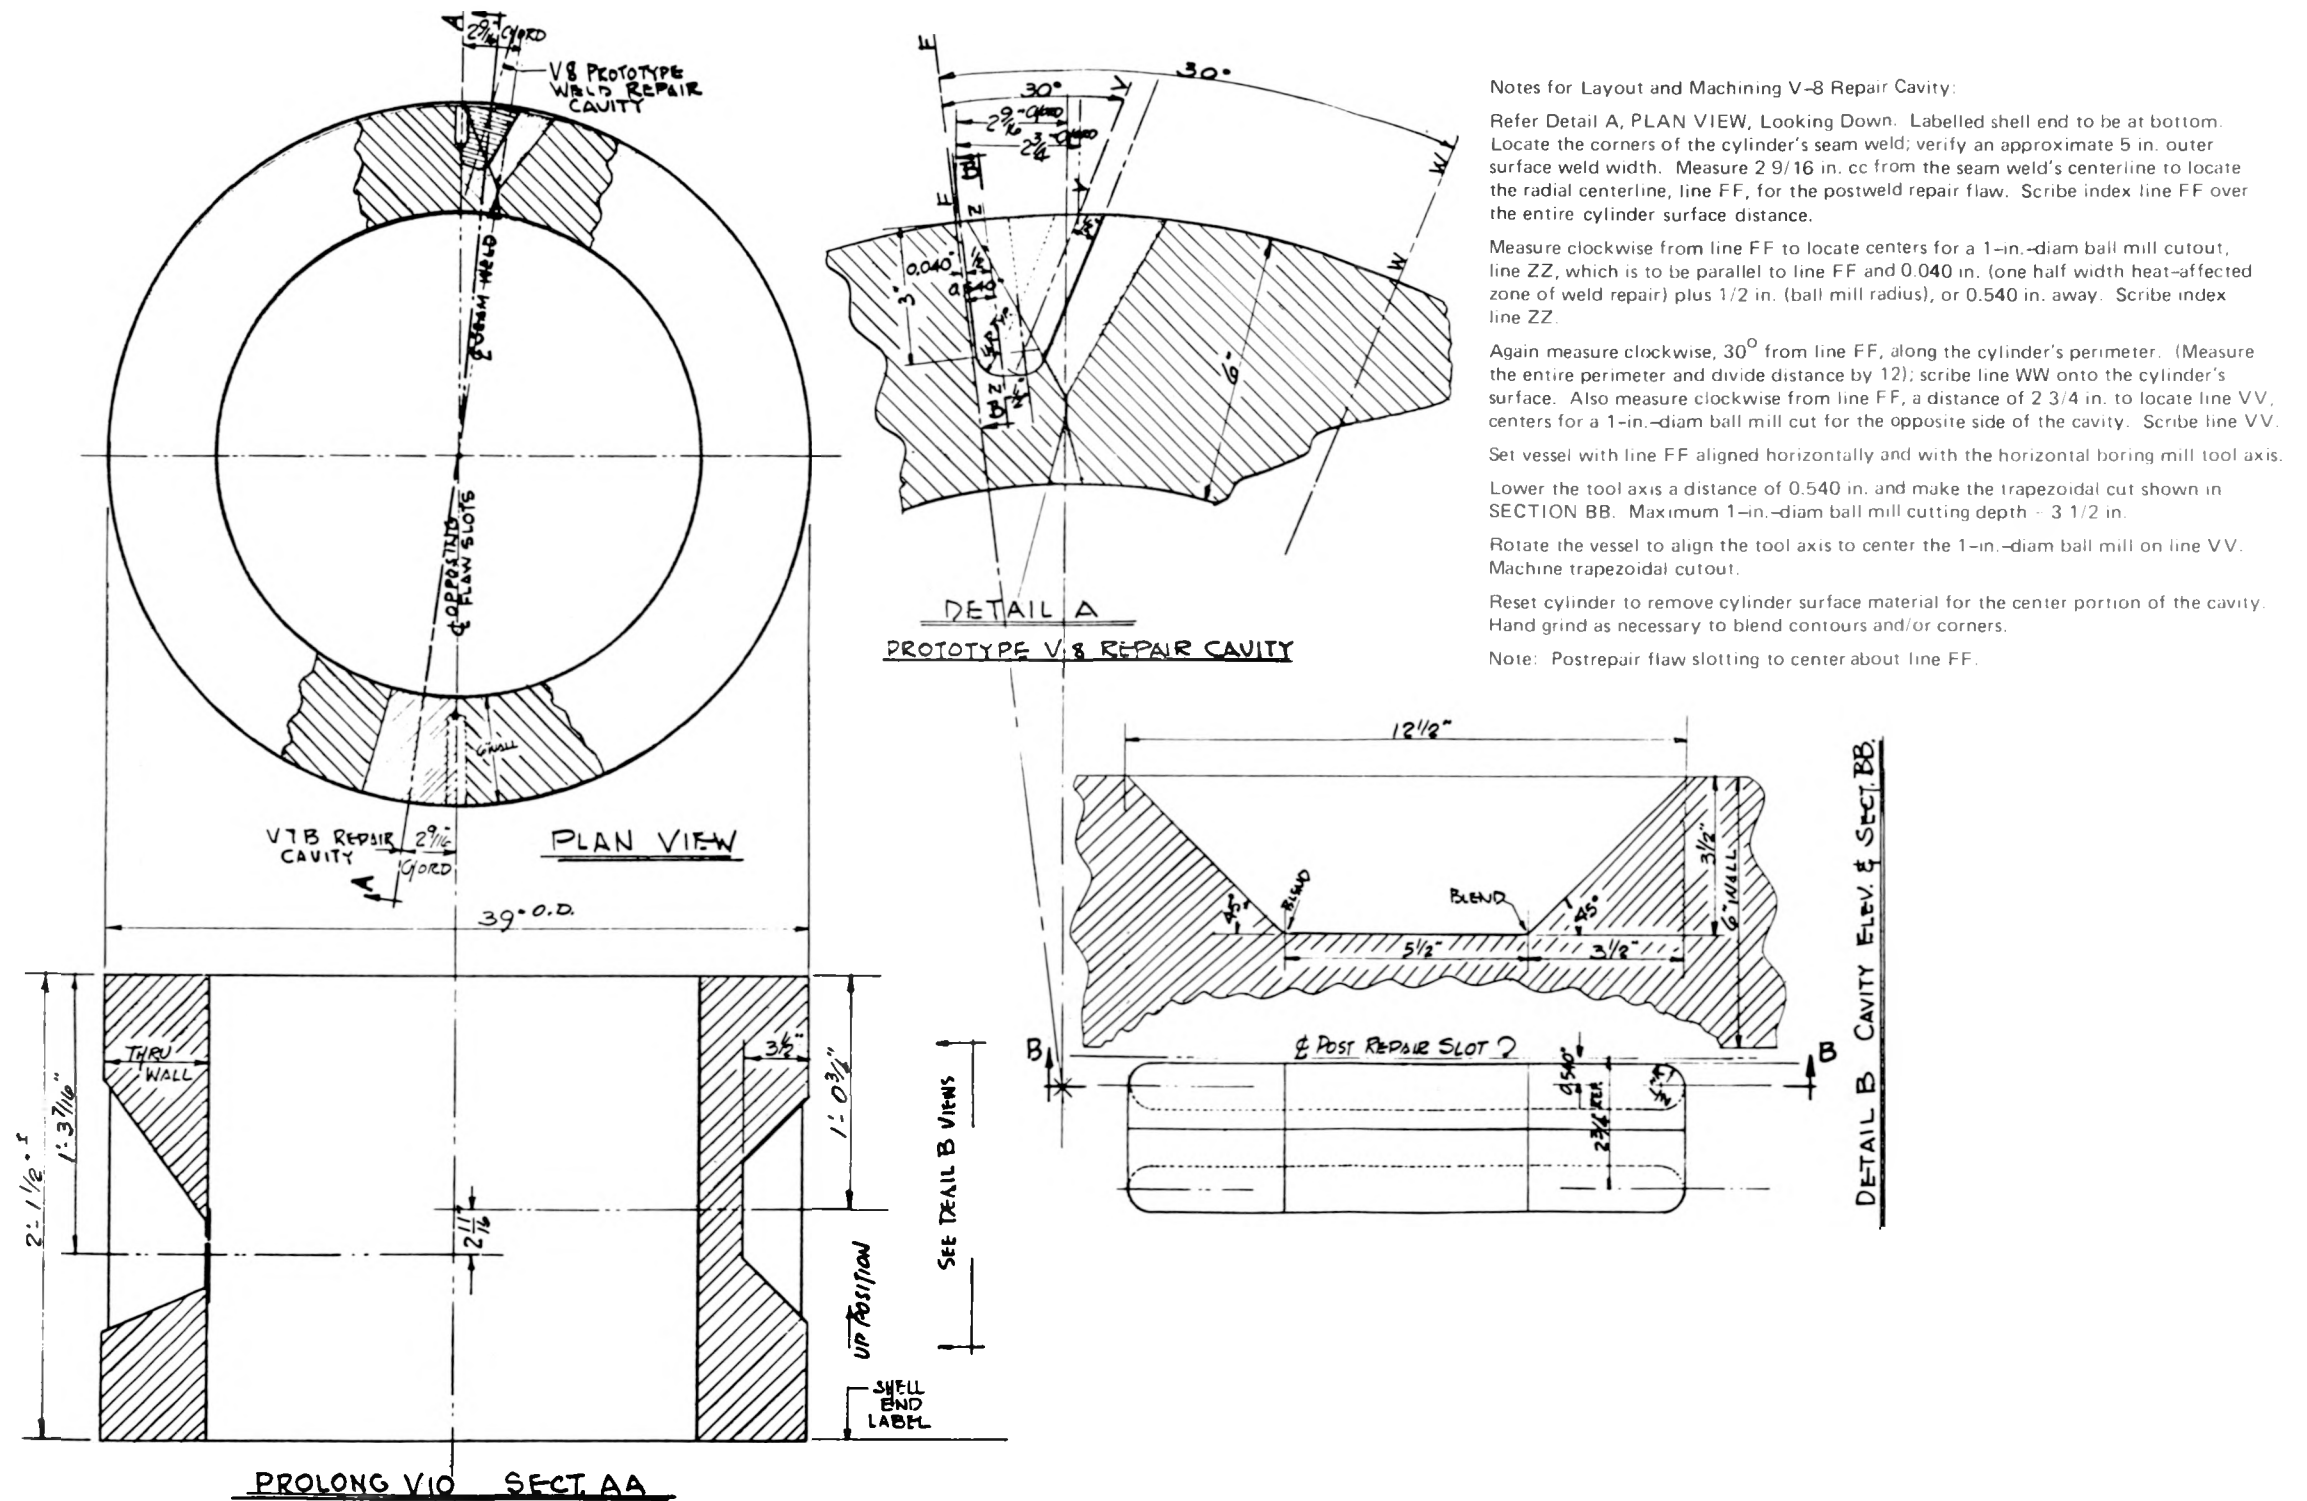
Weld procedure prolongation V10 cavity layout for IVT 8 prototype repair weld.
